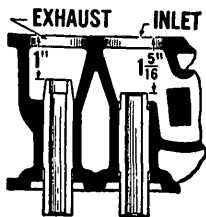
Position of valve stem guides in four cylinder L-Head engine. 1935-50
